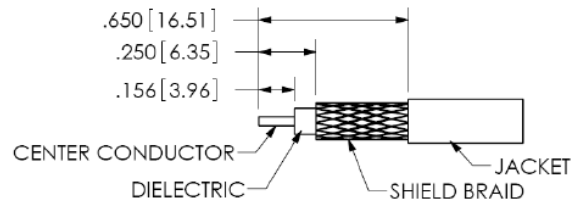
RG-400/RG-142 Coaxial Cable Stripping Dimensions
